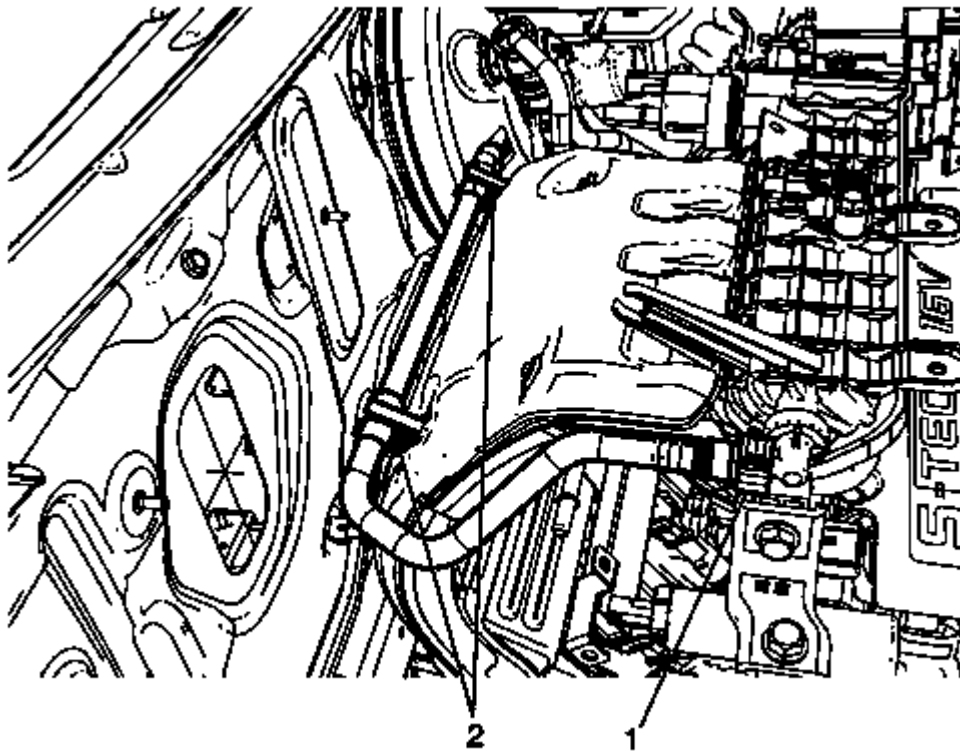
Power Brake Booster Vacuum Hose Quick Connector
